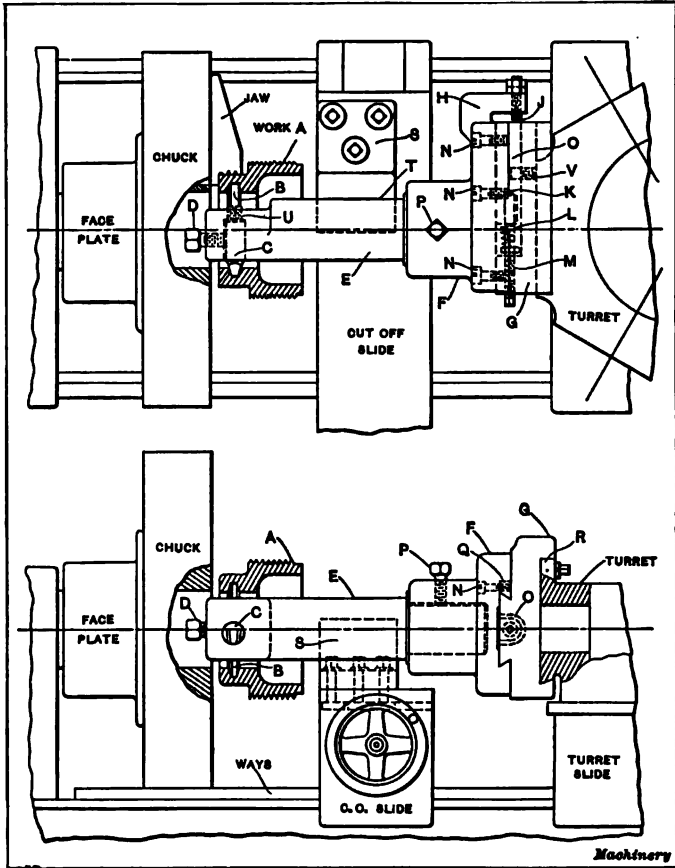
A Recessing Tool for an Automobile Bearing Retainer
